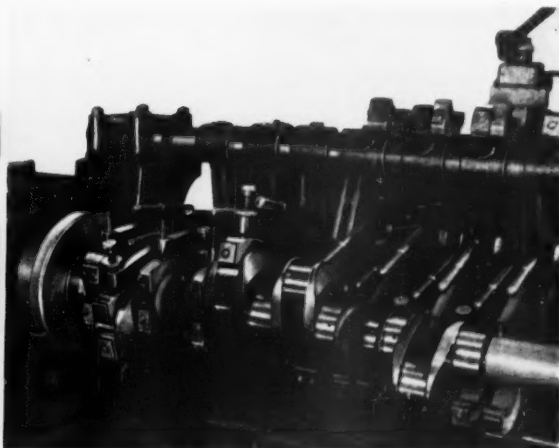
A special Shardlow machine for polishing all the bearings and crankpins
